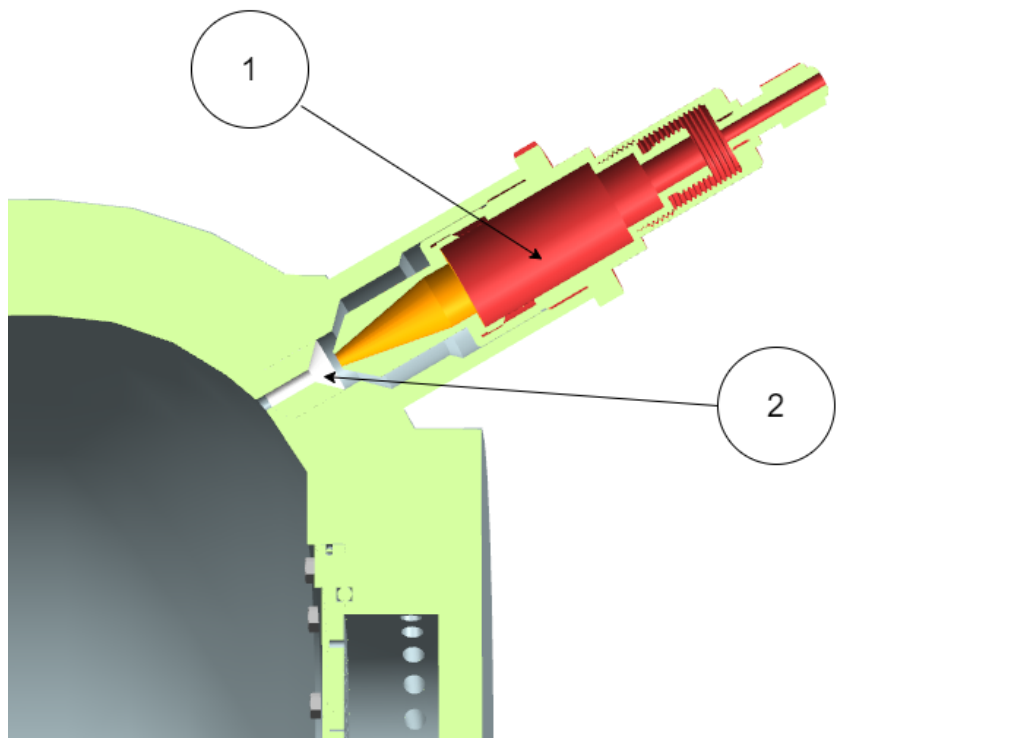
Section of the igniter, 1 - Plasma torch, 2 - Fuel pellet
